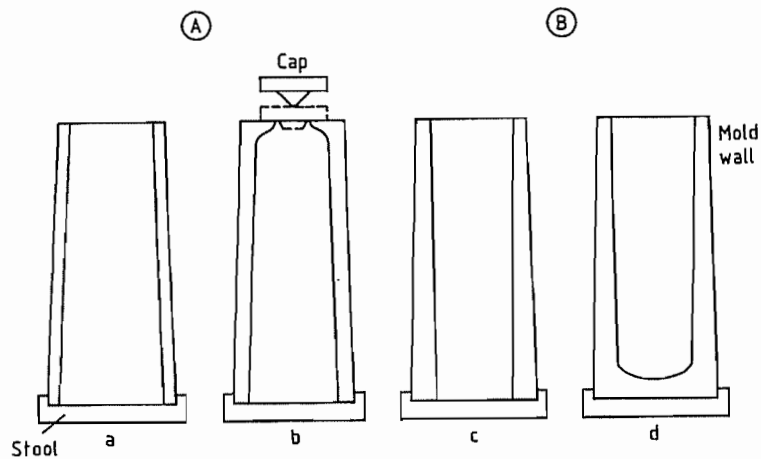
Cross sections (not to scale) of the principal types of ingot mold [91]. A) Big-end-down-molds: open top (a) and bottle top (b); B) Big-end-up-molds: open top (c) and closed top (d).
